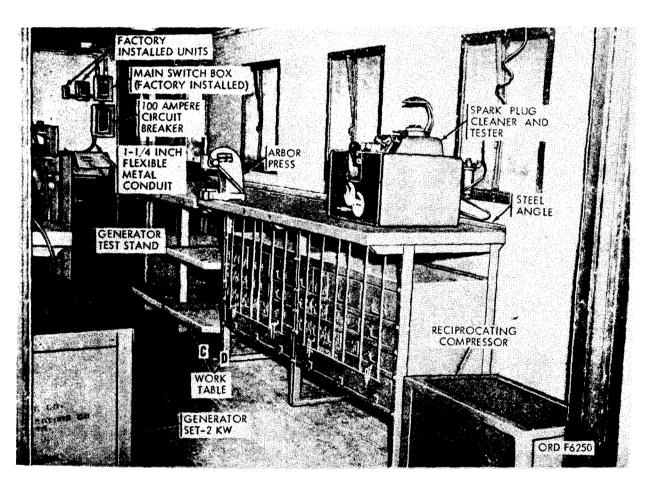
Equipment installed in shop-ran semitrailer - front and right side view.
